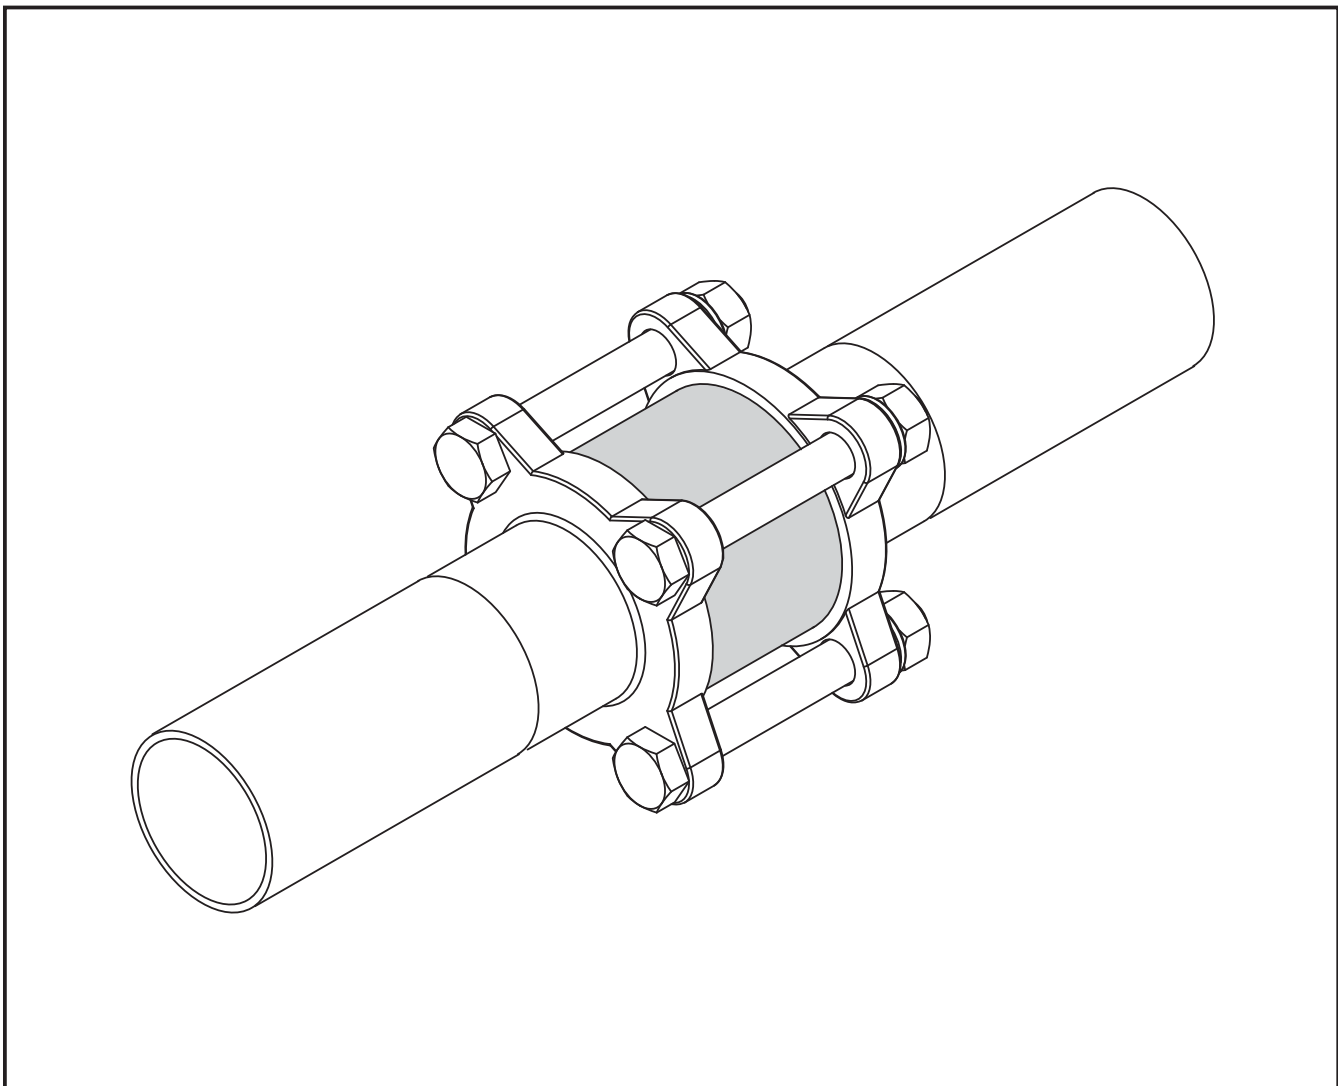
ball valves,mouting welded connections, welding of the connection ends(Fig.: Art. ZE311064)
